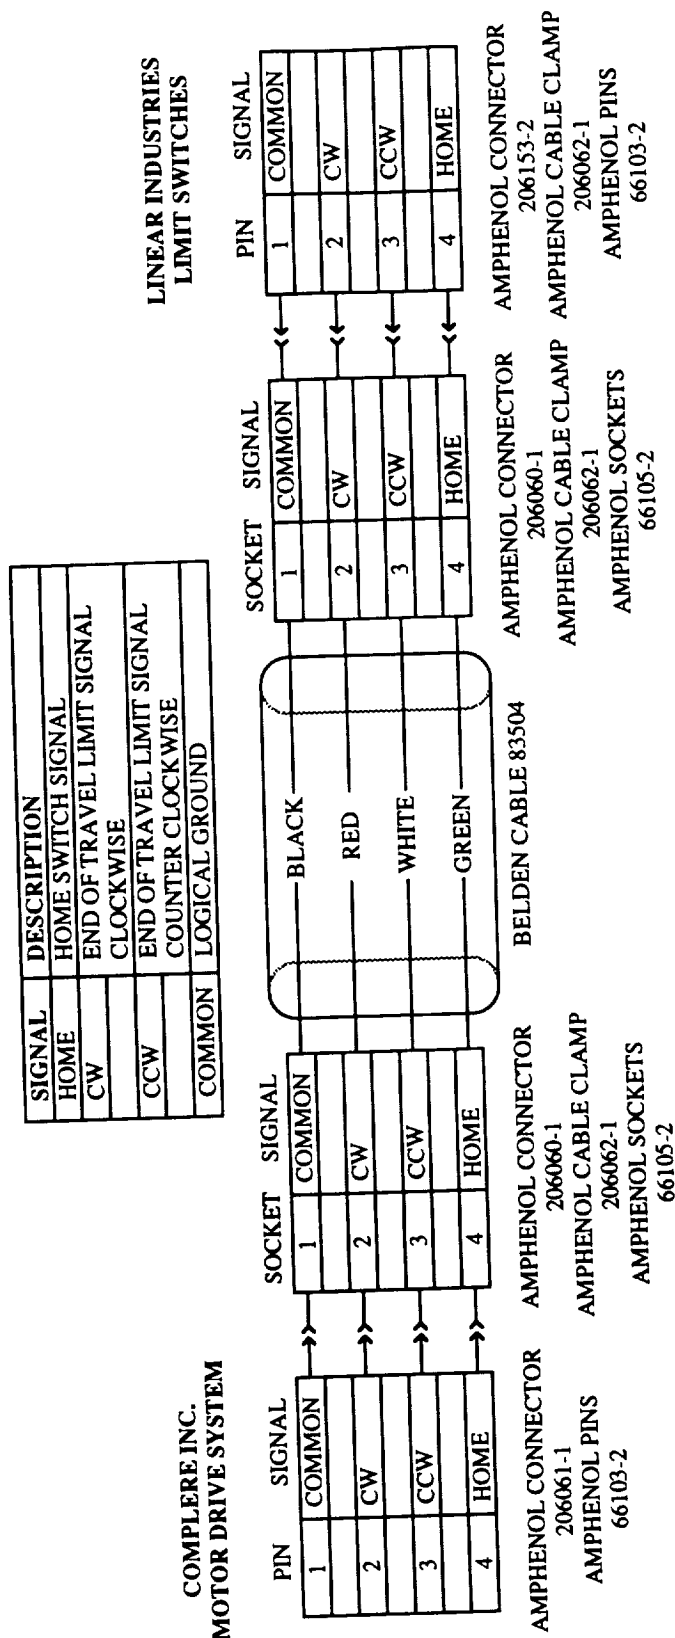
Motor Drive System to Linear Industries Limit Switches Cable.
